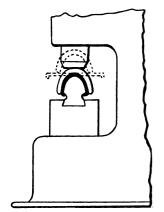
BENDING WITH DIE UNDER THE HAMMER.
